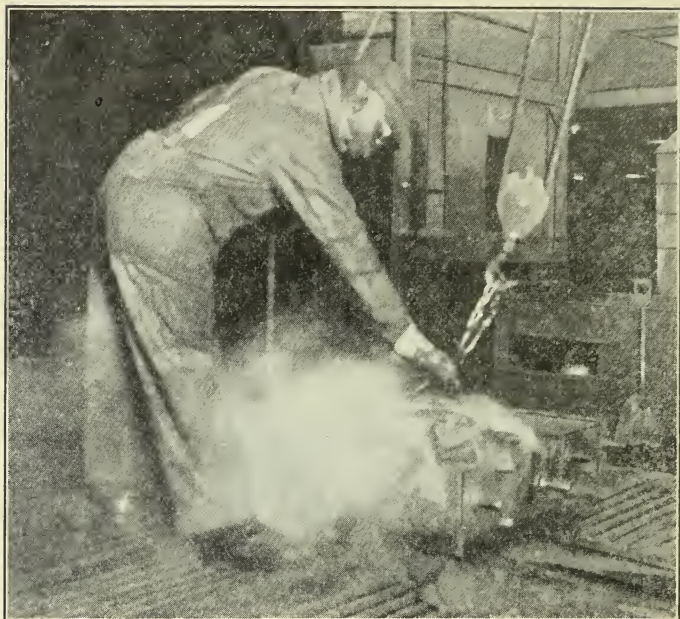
AFTER THE MOLDS ARE SHAKEN OUT, THE LOOSE SAND FALLS THROUGH A GRATING TO A SUNKEN CONVEYOR
